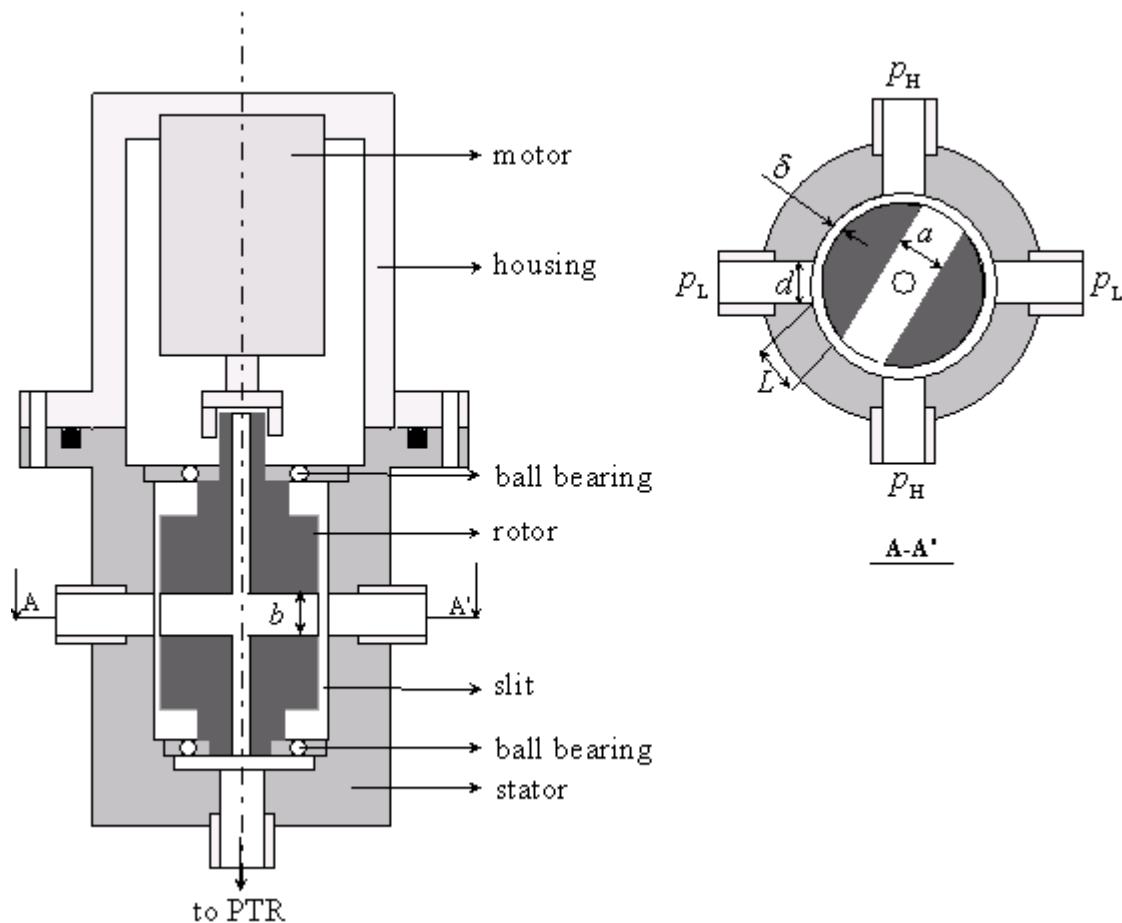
23. Schematic drawing of the ‘no-contact’ rotary valve, consisting of the rotor, placed in the housing, and the DC motor. A gap, δ , prevents mechanical contact between the rotor and the housing. In the housing the opposing connections to the high- and the low-pressure side of the compressor are made. The rotor contains two channels: the radial channel with the height b and the width a , and the axial channel. The channels provide a balance of the forces on the valve both in the radial and the axial direction
